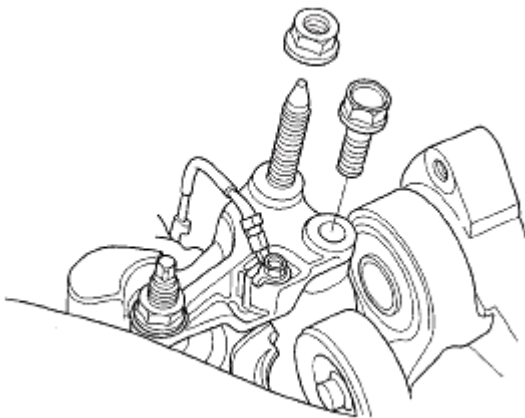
Identifying Upper Engine Mount Bracket Bolt And Nut
